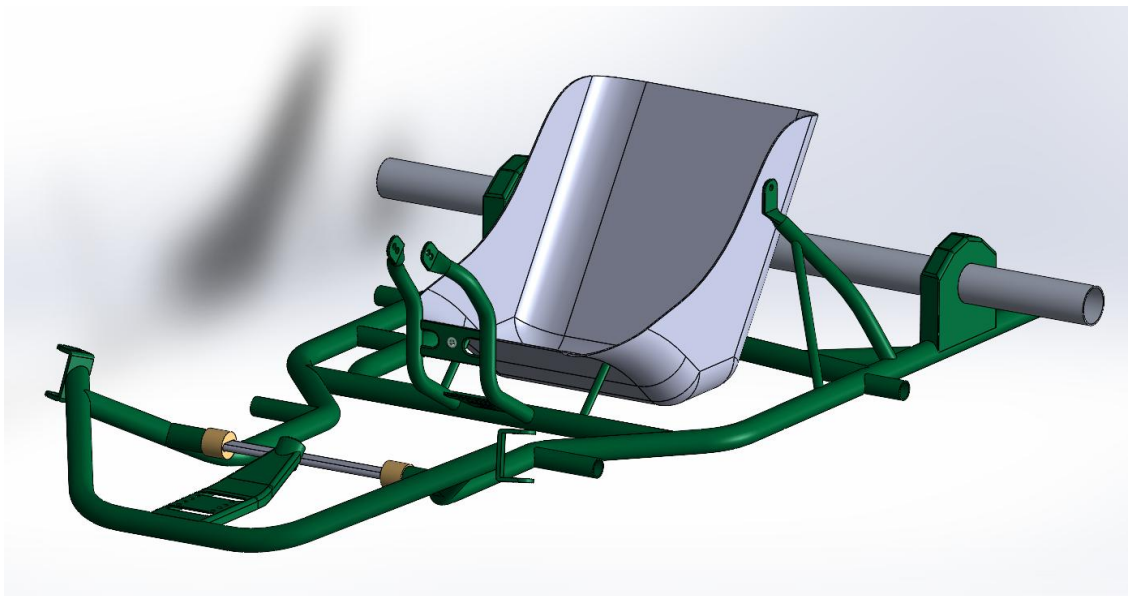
ASSEMBLY 3D CAD MODEL.
